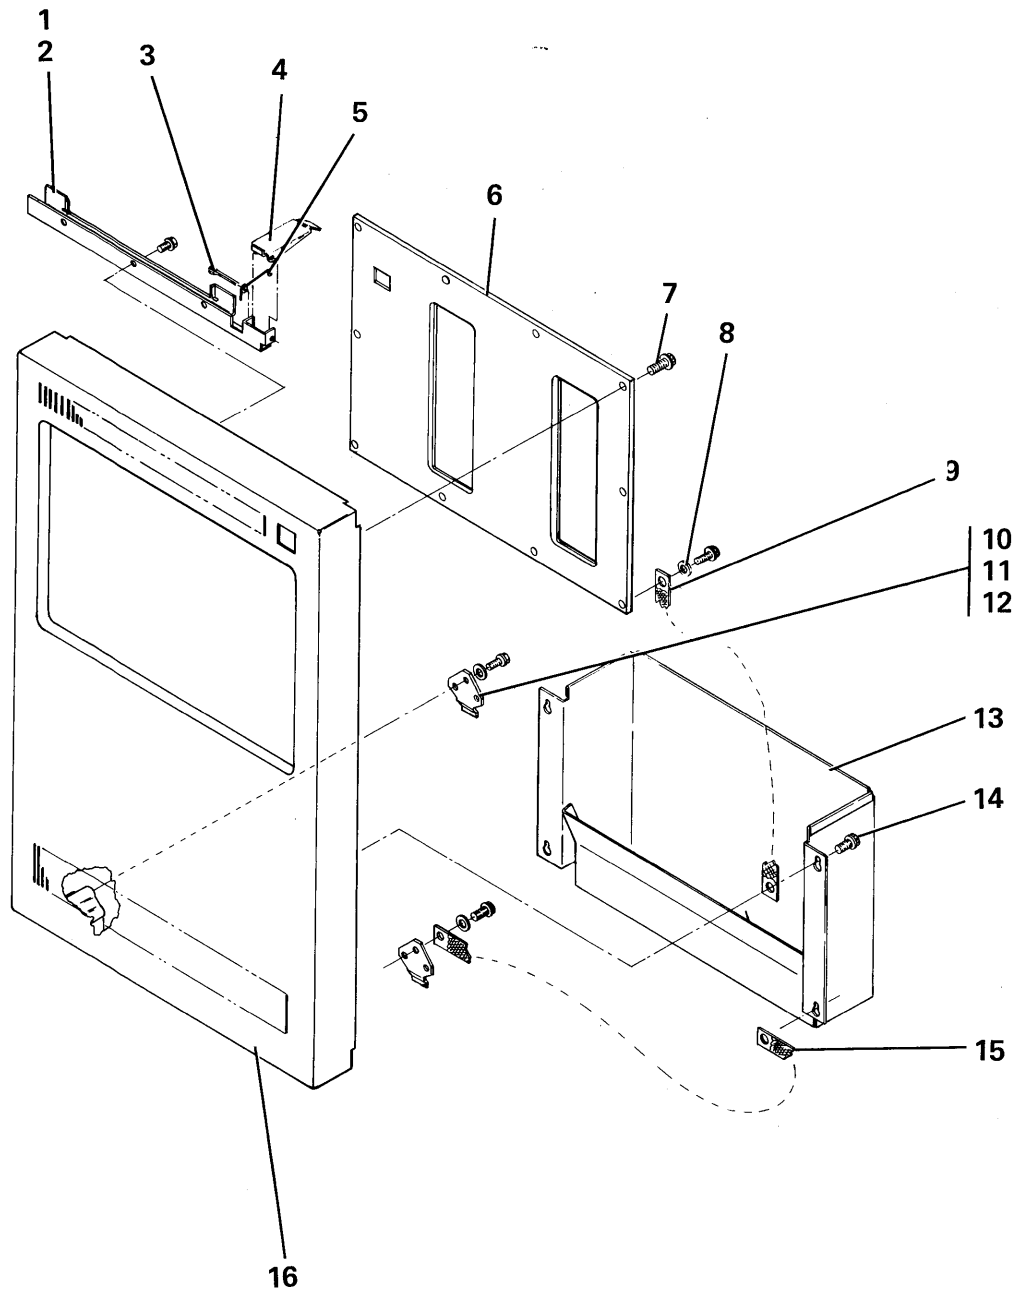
FRONT DOOR ASSEMBLY. SEE LIST 2.
